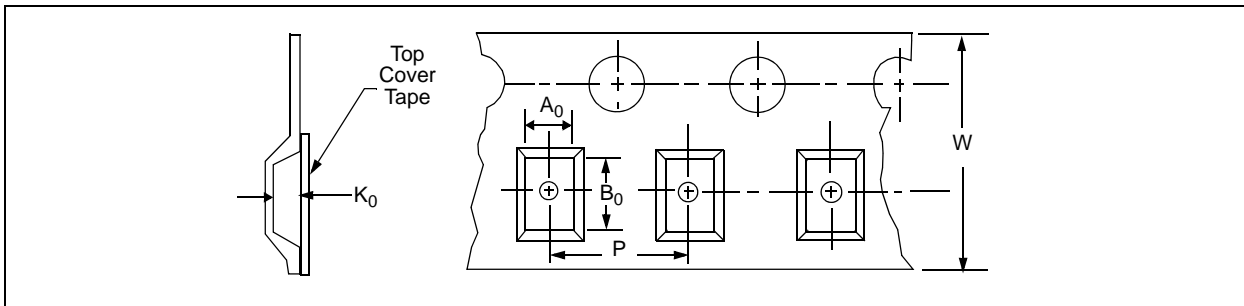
Embossed Carrier Dimensions (8, 12, 16 and 24 mm tape only).
